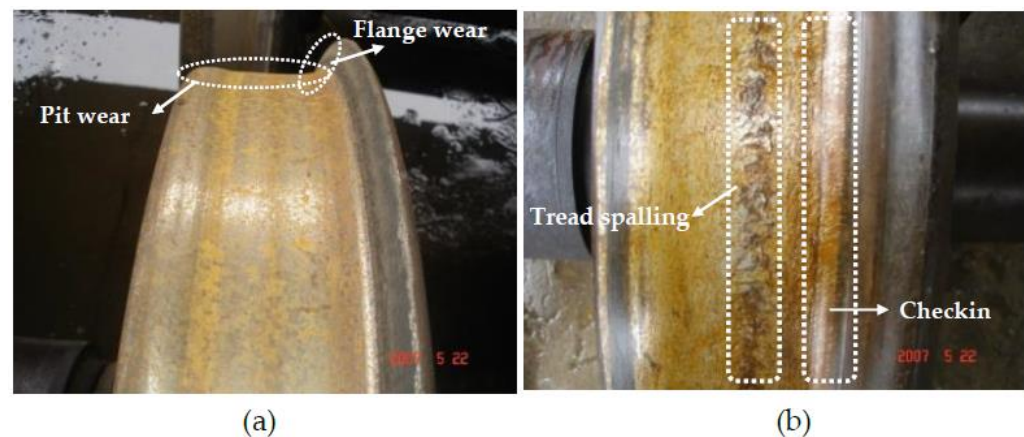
(a) Serious pit wear on the lateral tread of wheel; (b) wheel tread spalling and flange root checking [16].
